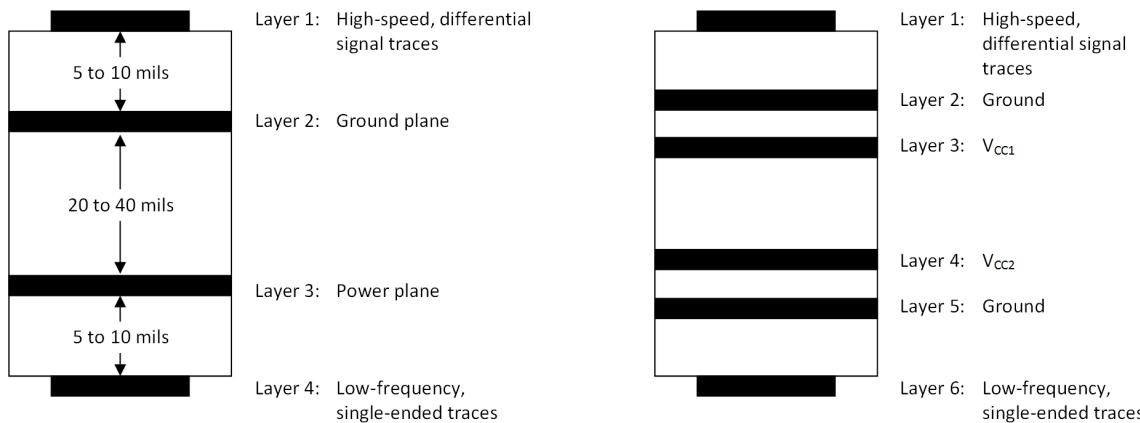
Recommended 4- or 6-Layer (0.062") Stack-up for a Receiver PCB Design
